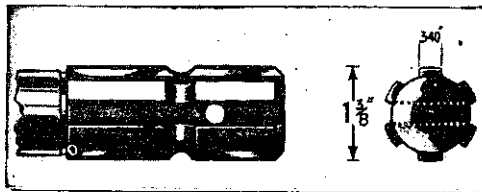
POWER TAKE-OFF SPLINED SHAFT
